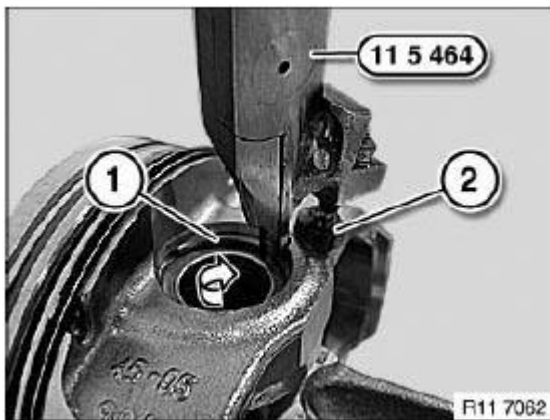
Removing Piston Circlip Using Special Tool 11 5 464
